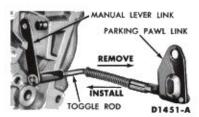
Parking Pawl Toggle Rod Assembly Removal or Installation
